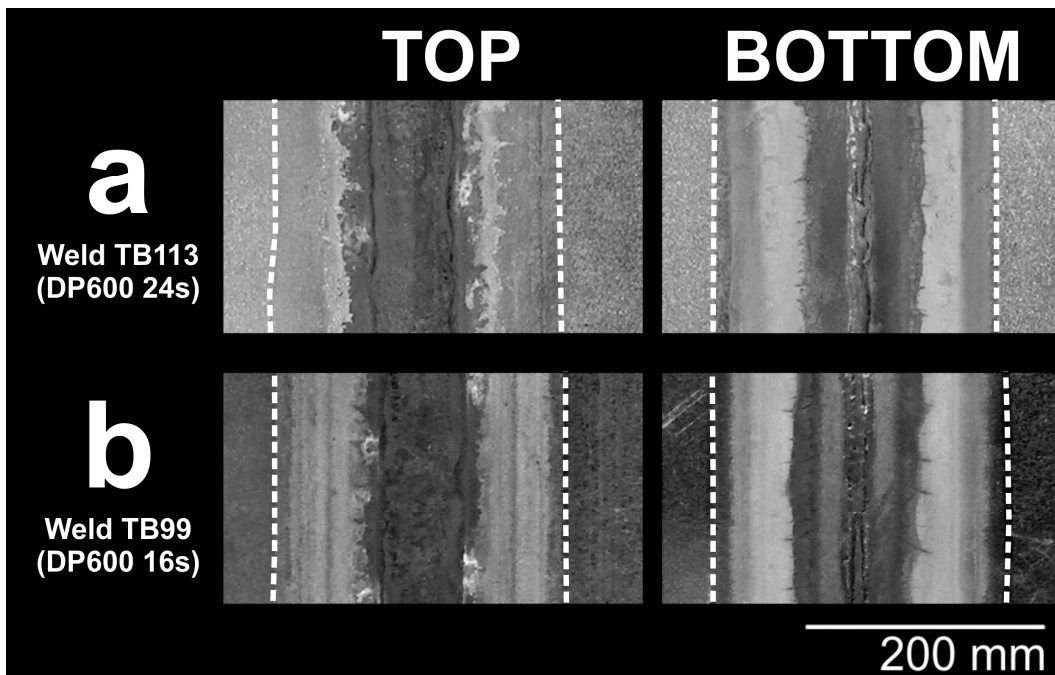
Example images that show a comparison between two welds that were made using the same welding parameters but were on different thickness DP600 sheet steels. The two welds had similar relative heat input.
